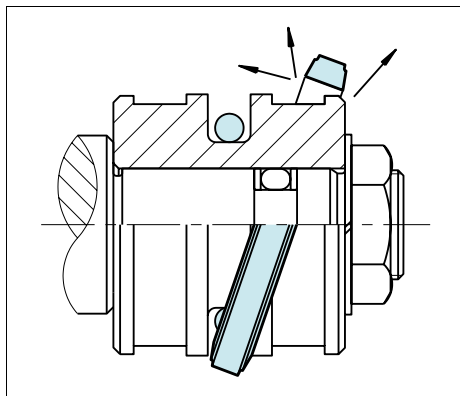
Fitting the seal ring onto the O-Ring in the groove
